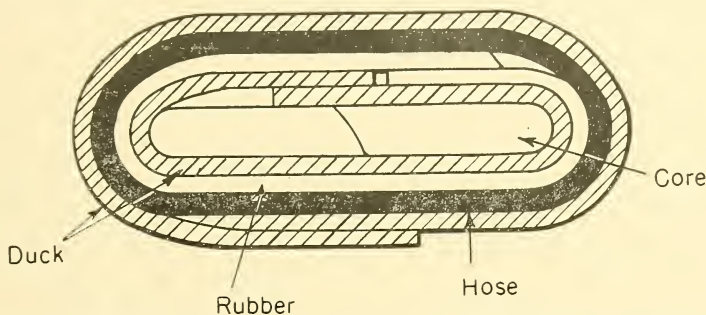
Arrangement of hose and steel core in splicing cotton-jacket, rubber-lined fire hose.
